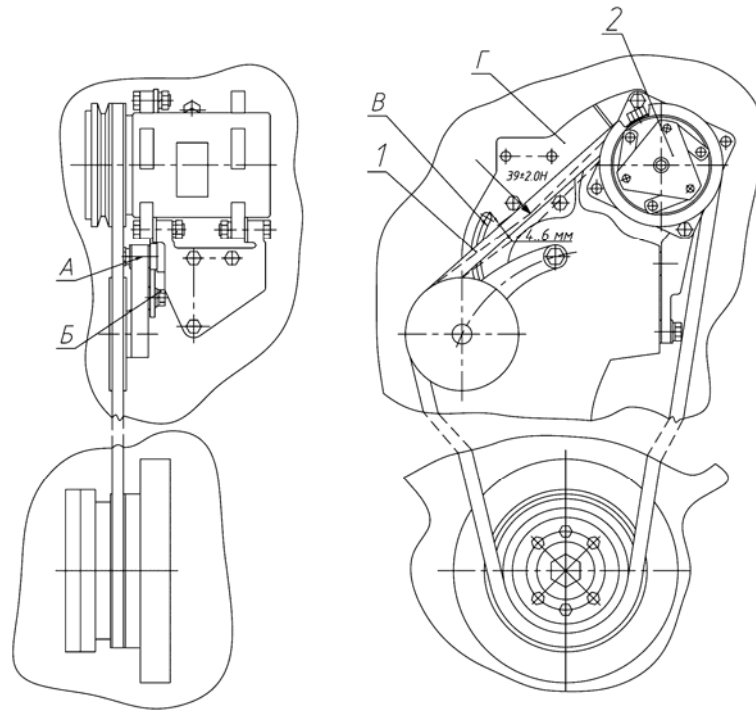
Check and adjustment of tension of the belt of air conditioner compressor drive of diesel MMZ.
